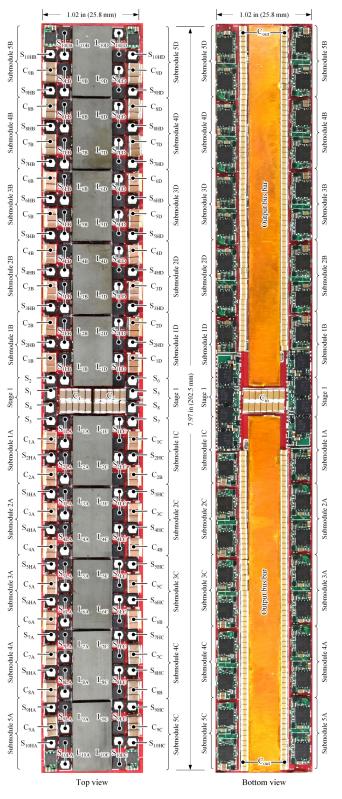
Photograph of the hardware prototype. Dimensions: $7.97 \times 1.02 \times 0.244$ in³ (202.5 × 25.8 × 6.2 mm³).
